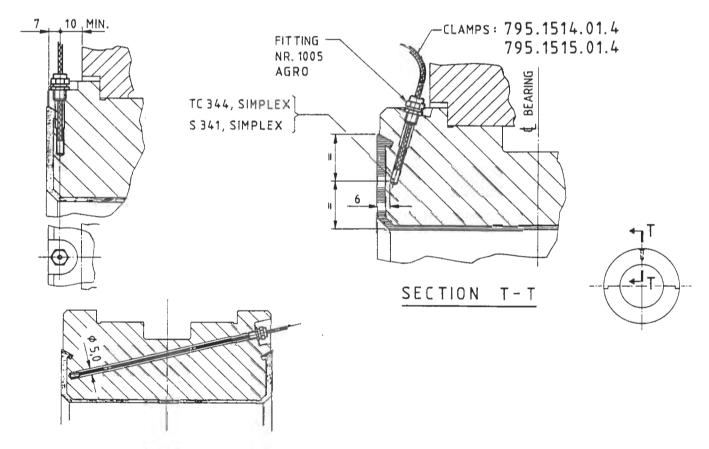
Technical details of embedded type TC and RTD's in taper land axial thrust bearing
